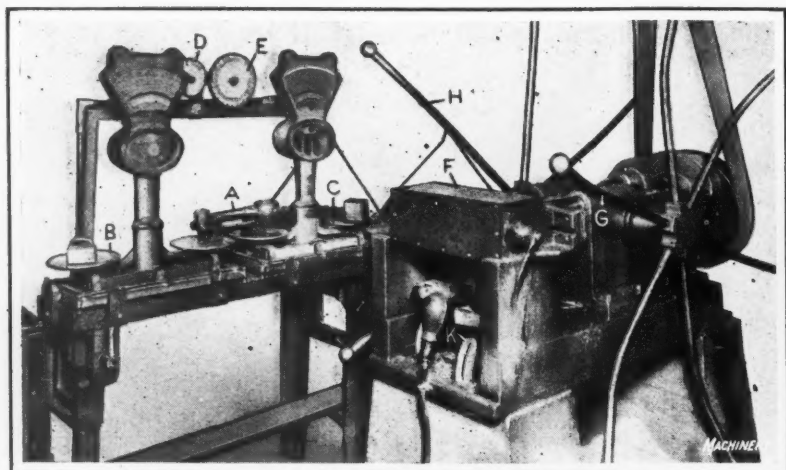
Scales used in determining the Amount of Metal to be removed from Connecting-rods to obtain the Desired Weight, and Horizontal Drilling Machine used for removing this Metal
